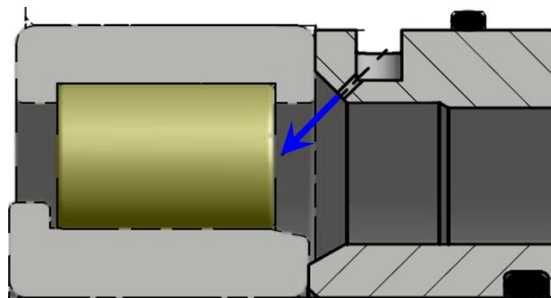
TYPICAL OIL JET LUBRICATION FOR BEARINGS
